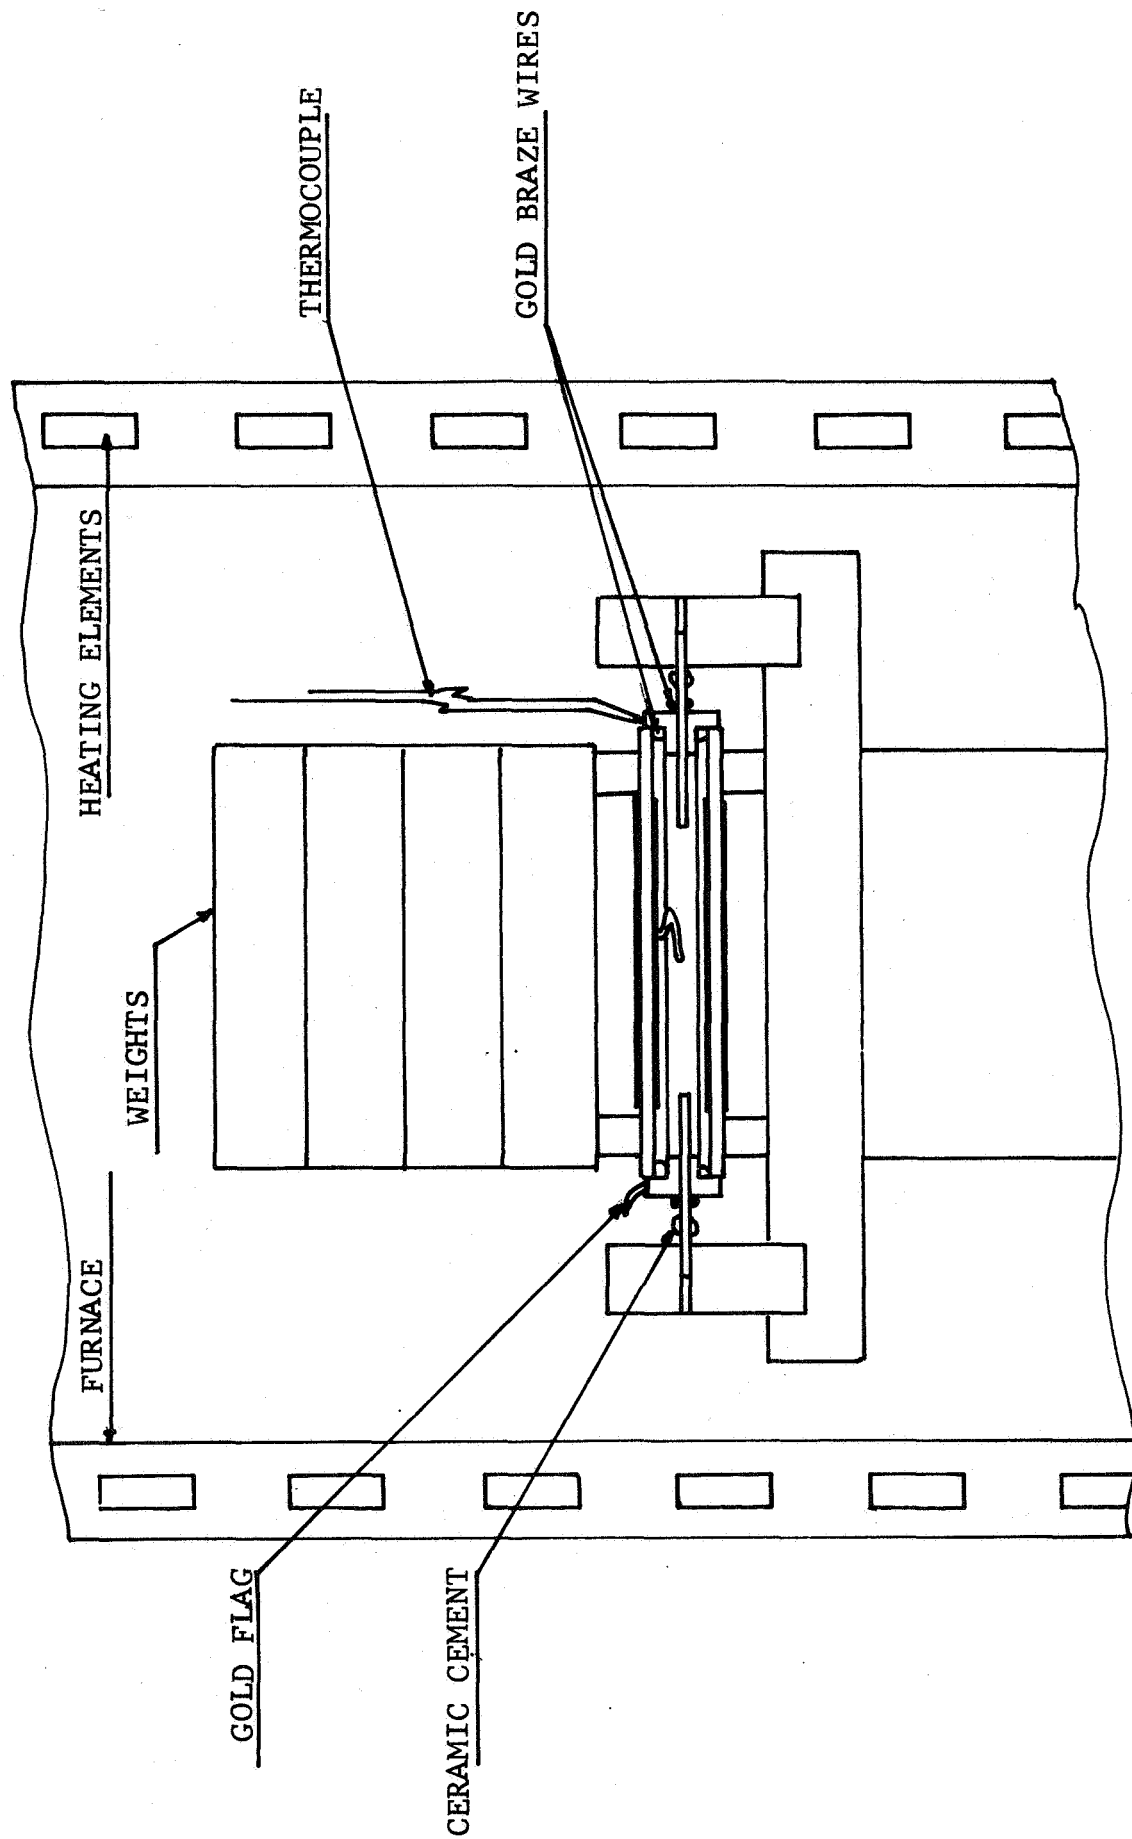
Drum in Brazing Jig in Sealing Furnace
